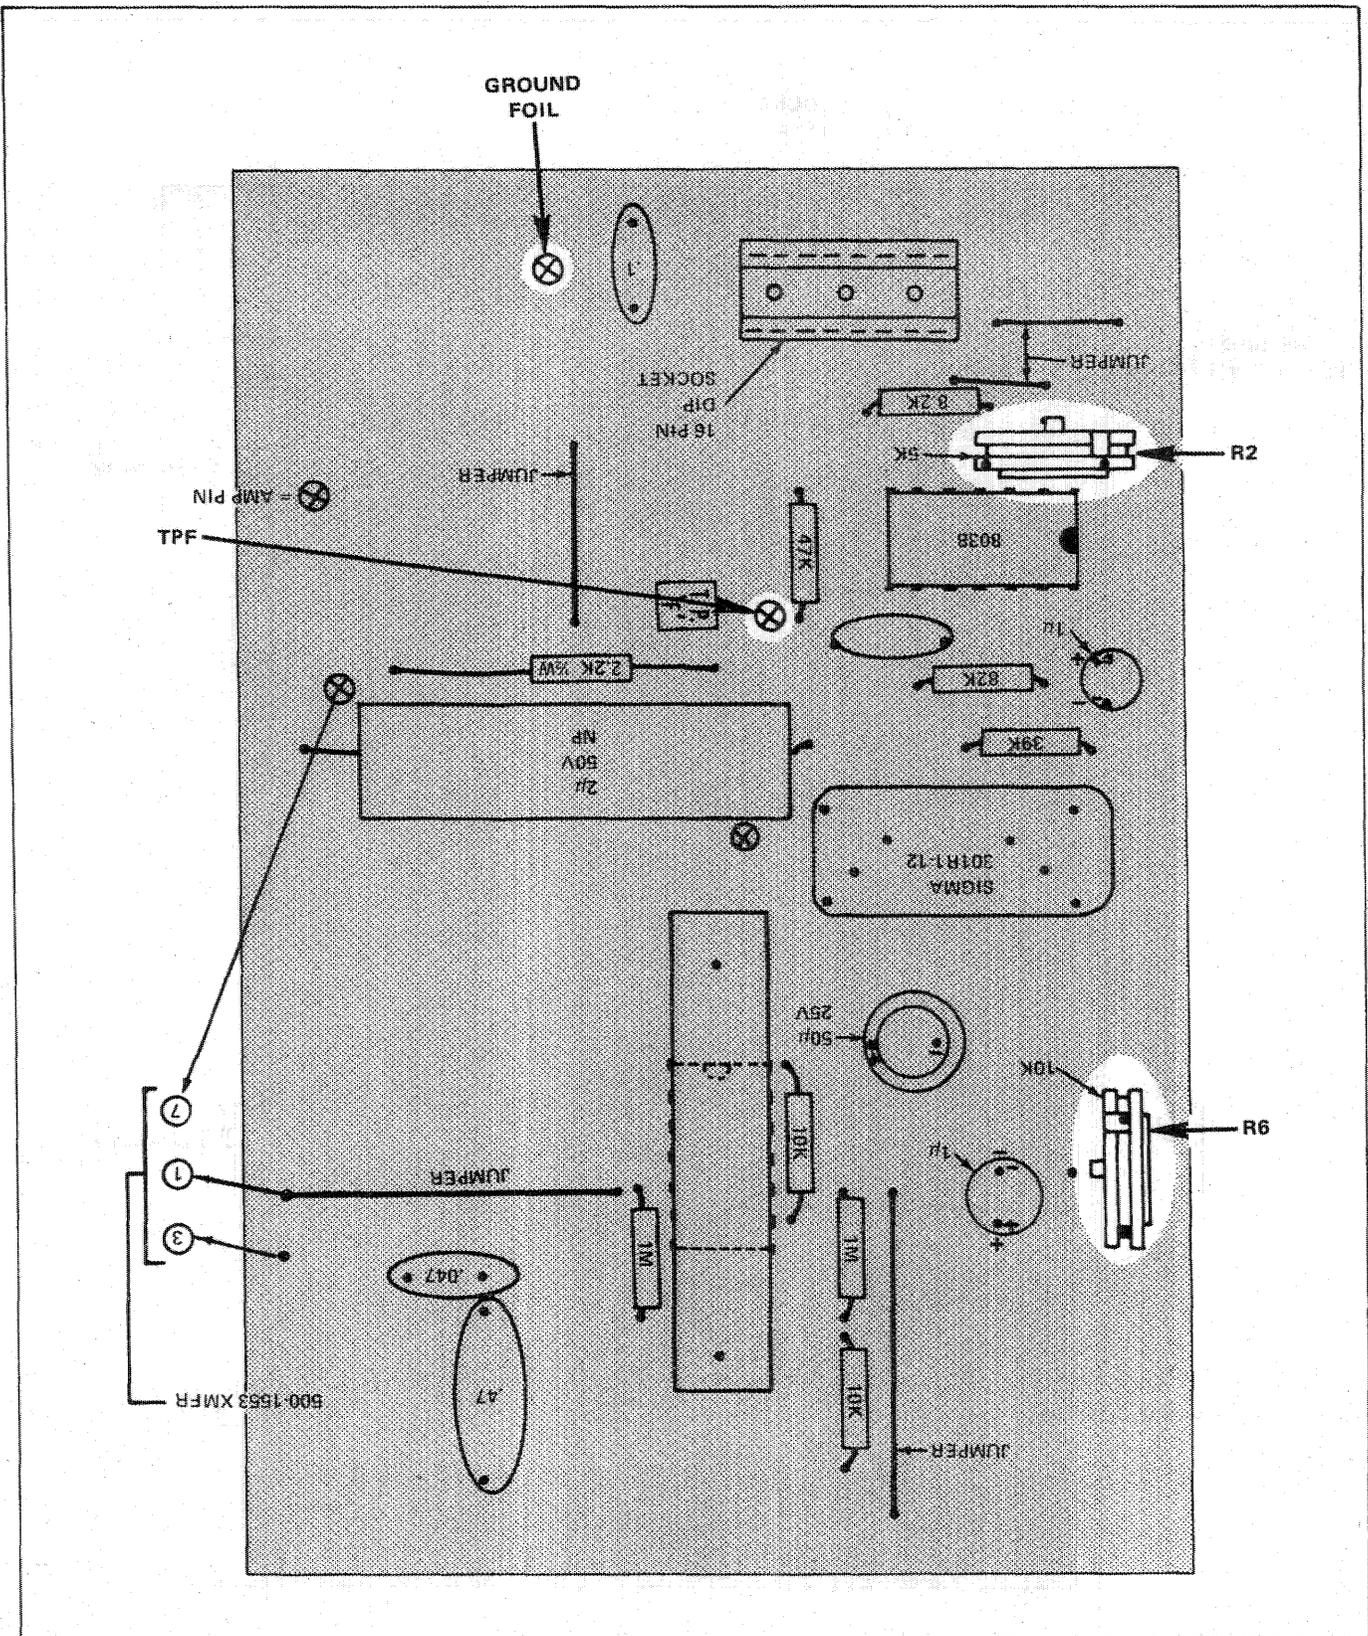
Card Assembly No. 23, Tuned Ringer Test Sets Only (T84 Models G, G1 and R),
